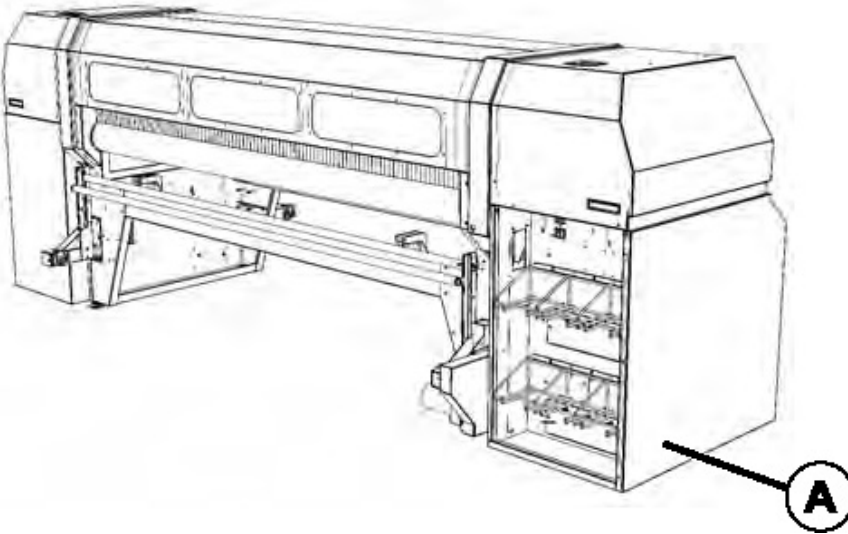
Location of vacuum assembly (inside printer enclosures) on HP Scitex FB950
